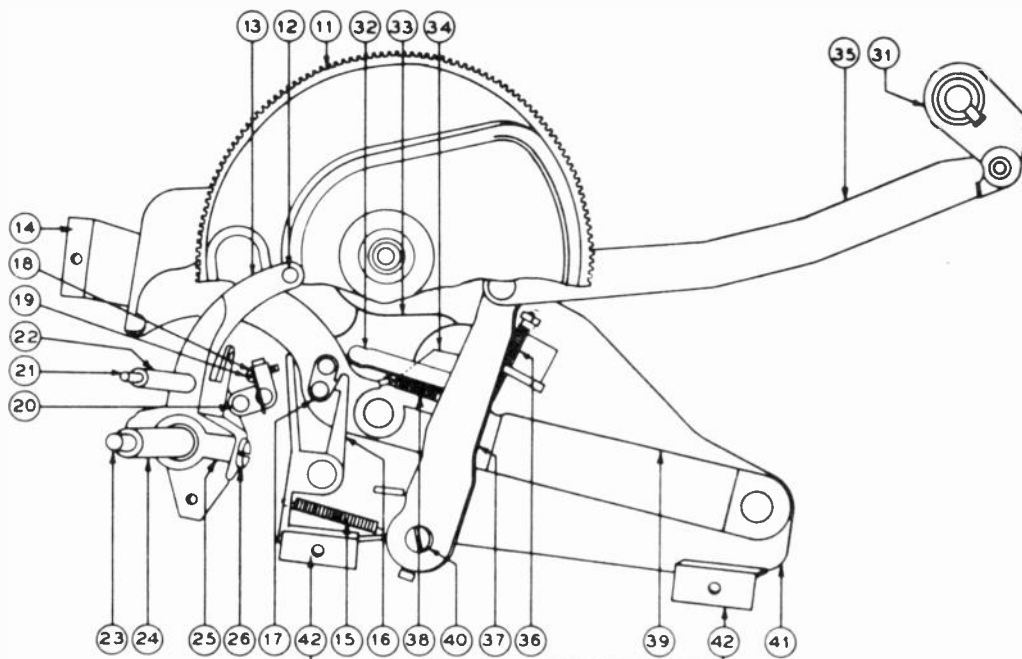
CUTAWAY VIEW SHOWING PARTS UNDER SUB-PLATE ASSEMBLY (83) FIG. 3
